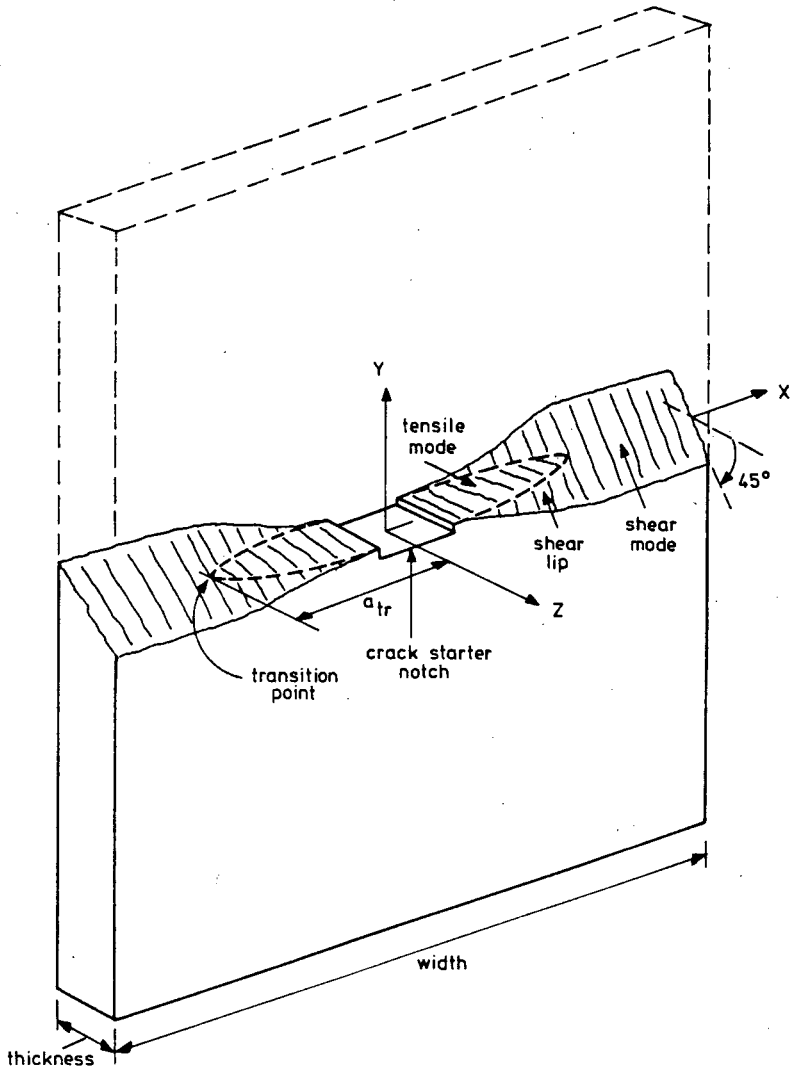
Transition from tensile mode to shear mode on fatigue crack facture surface in sheet specimen.
